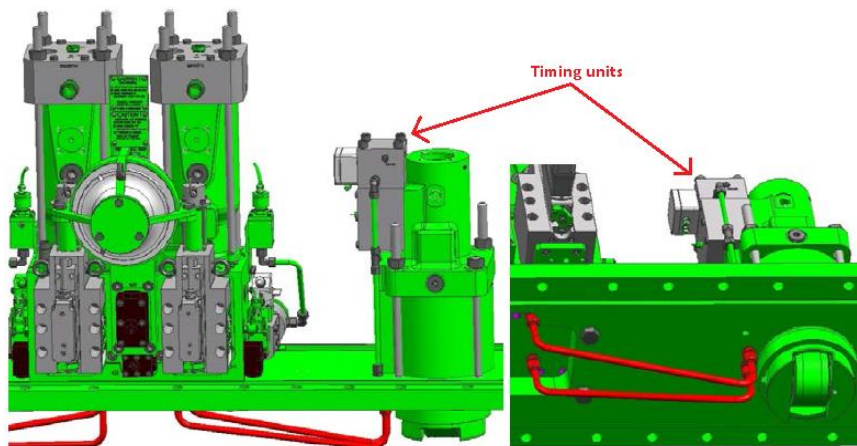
Exhaust Valve Actuator Timing Unit mounted on the exhaust valve actuator [22]
